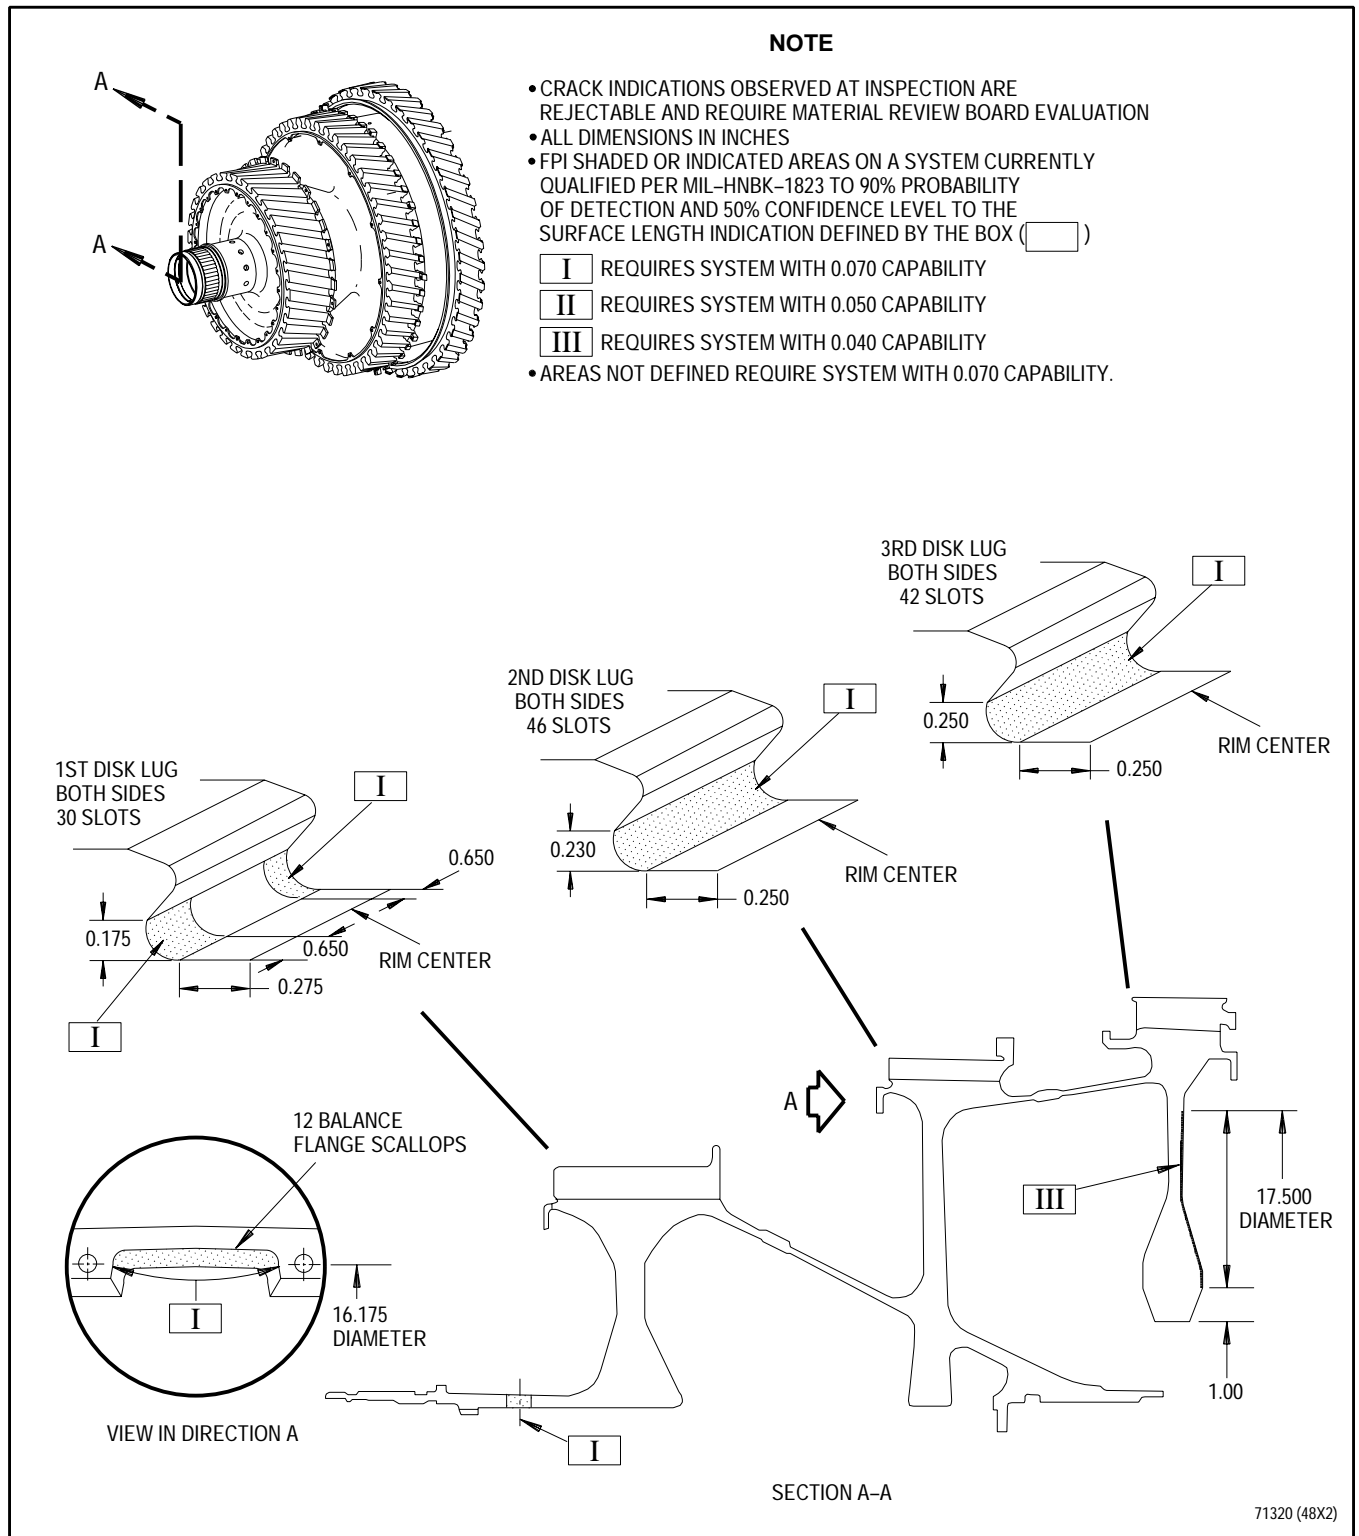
Front Compressor Drum Rotor Disk Assembly - Required Fluorescent Penetrant System Capability
